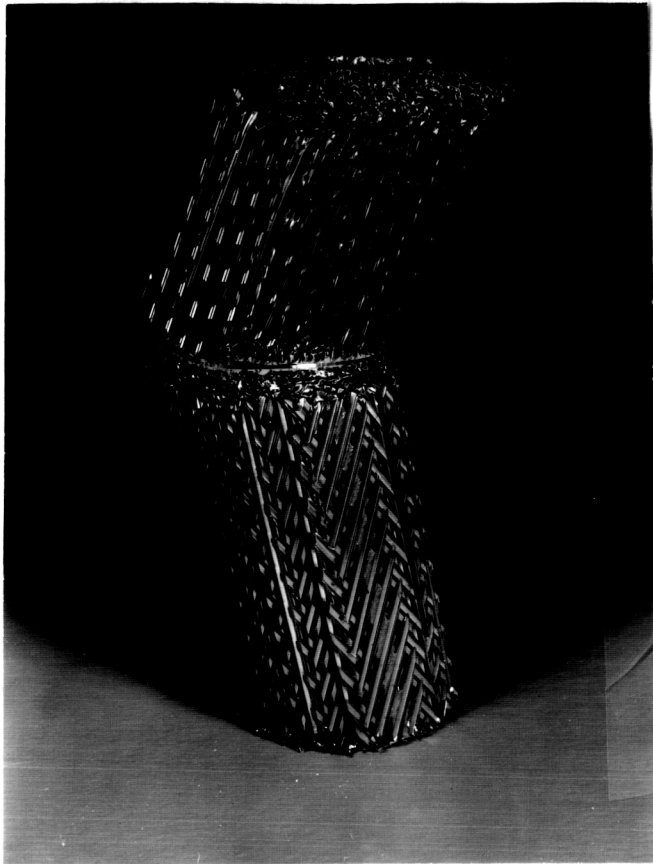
F Buckling failure of a 30-0-30 CROSS-CORE
